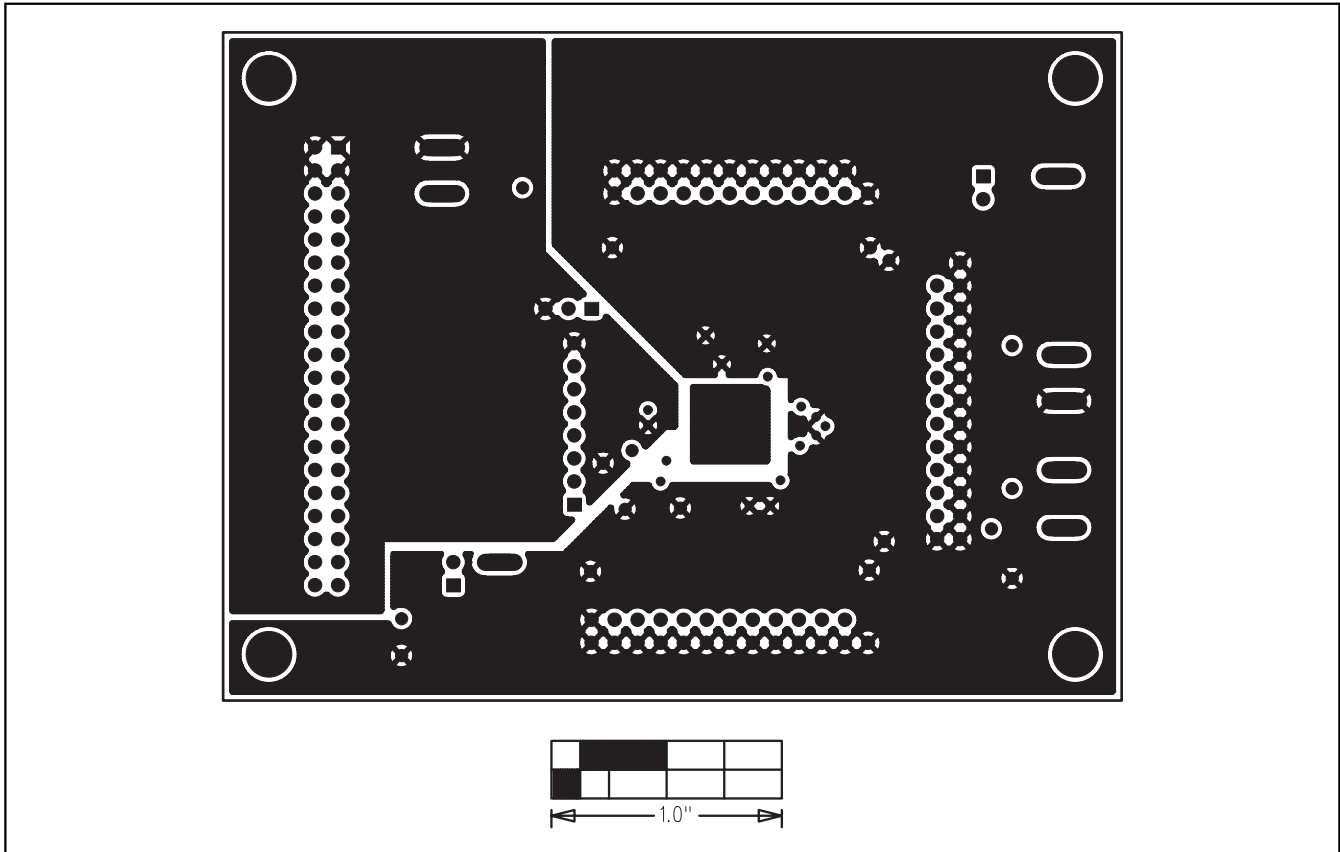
MAX5734 EV Kit PC Board Layout—Ground Layer
